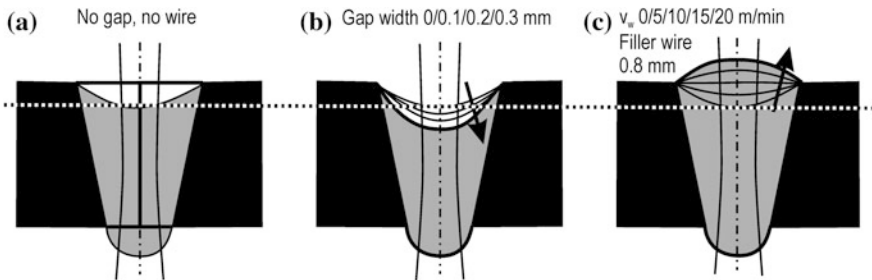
Calculated weld seam cross section for a zero gap, b different gap widths, c different filler wire speed v_w (wire diameter 0.8 mm)
